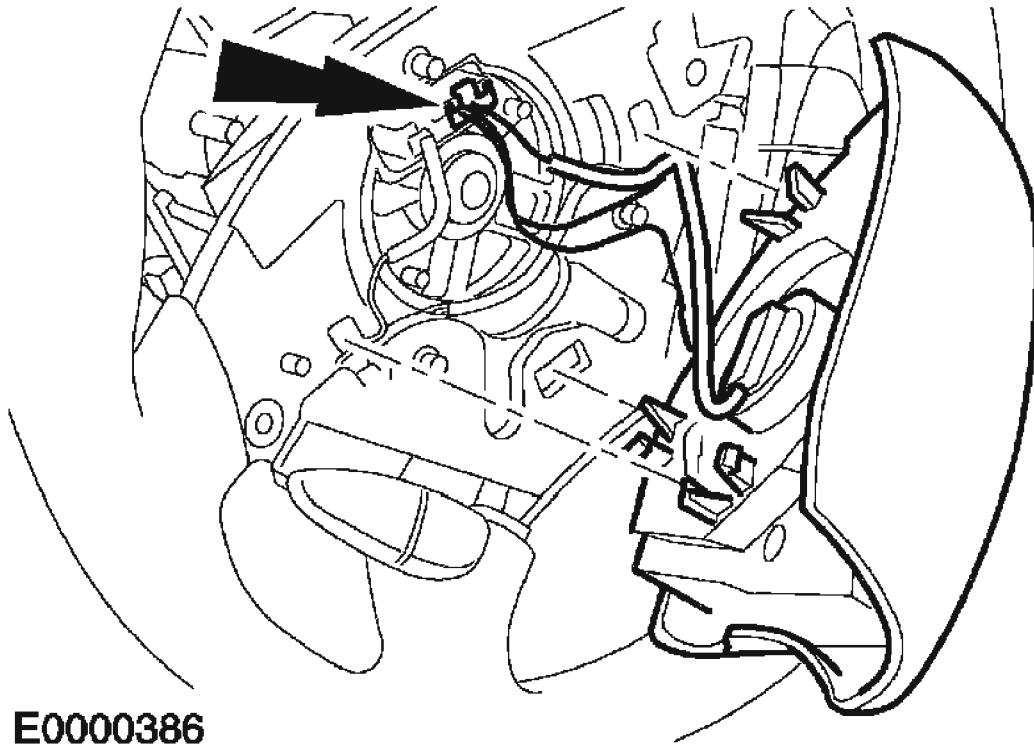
Installing Steering Column LH And RH Multifunction Switches
